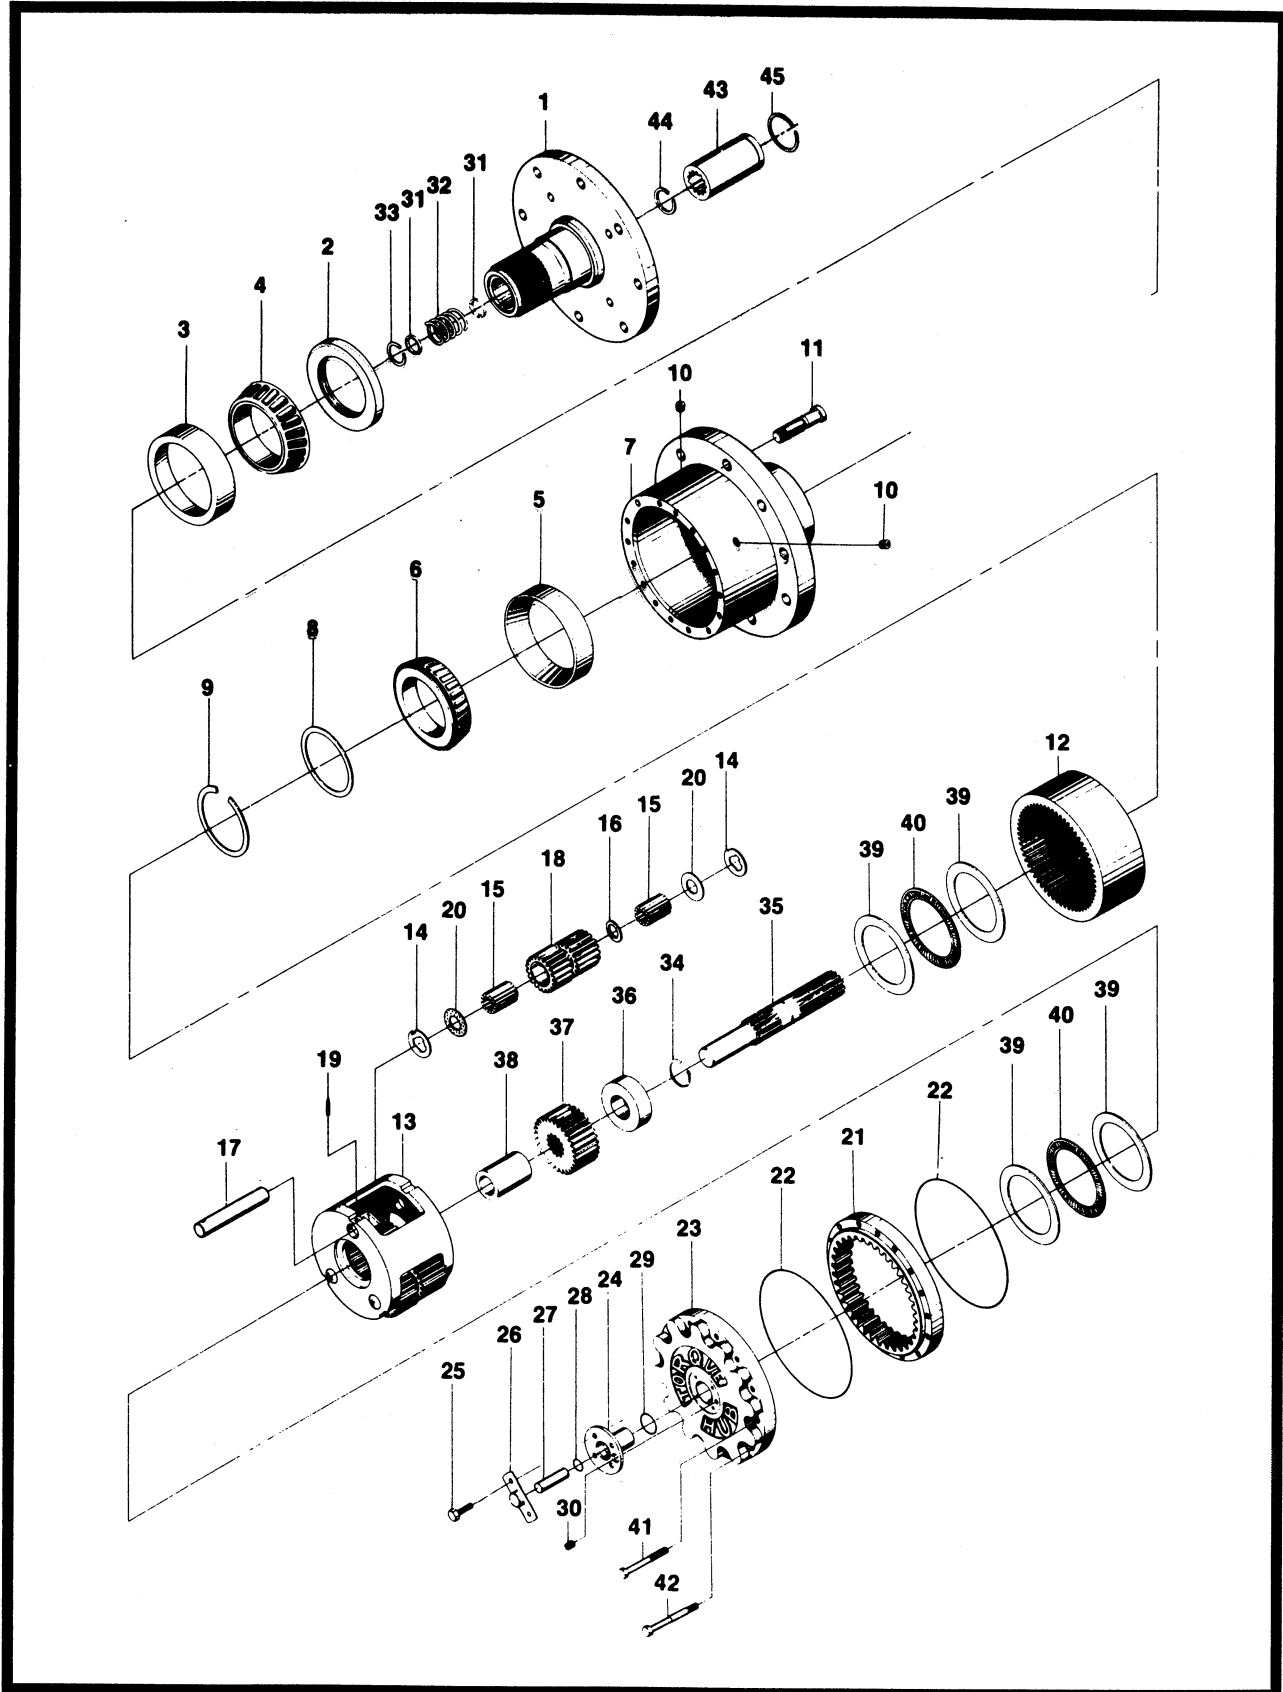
Torque Hub Assembly, Machines Built Prior To Mid 1991.
